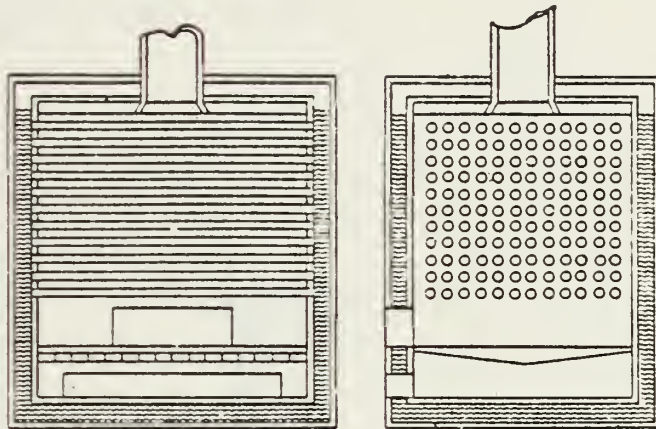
BOX-SHAPE WATER-TUBE BOILER - 1793
